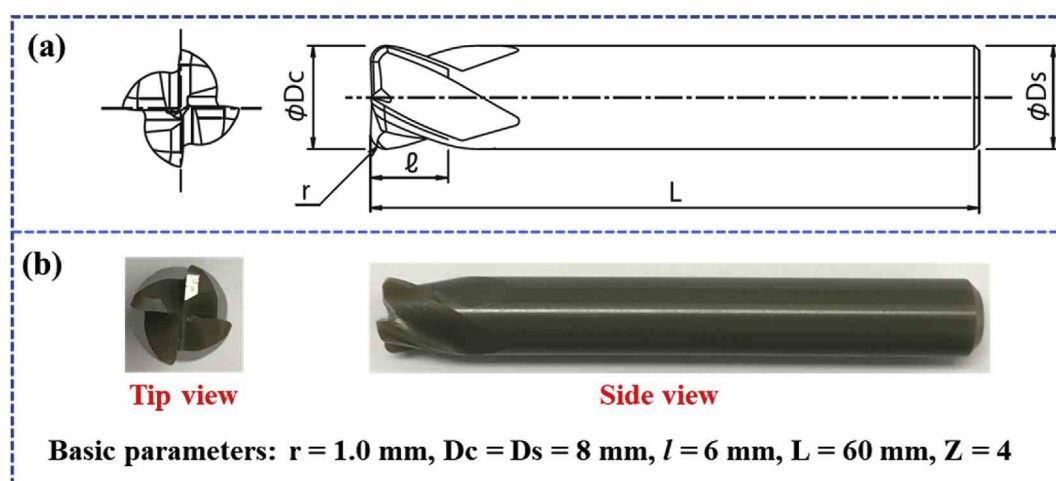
(a) External shape dimensions and (b) images and basic parameters of the solid ceramic end mill.
